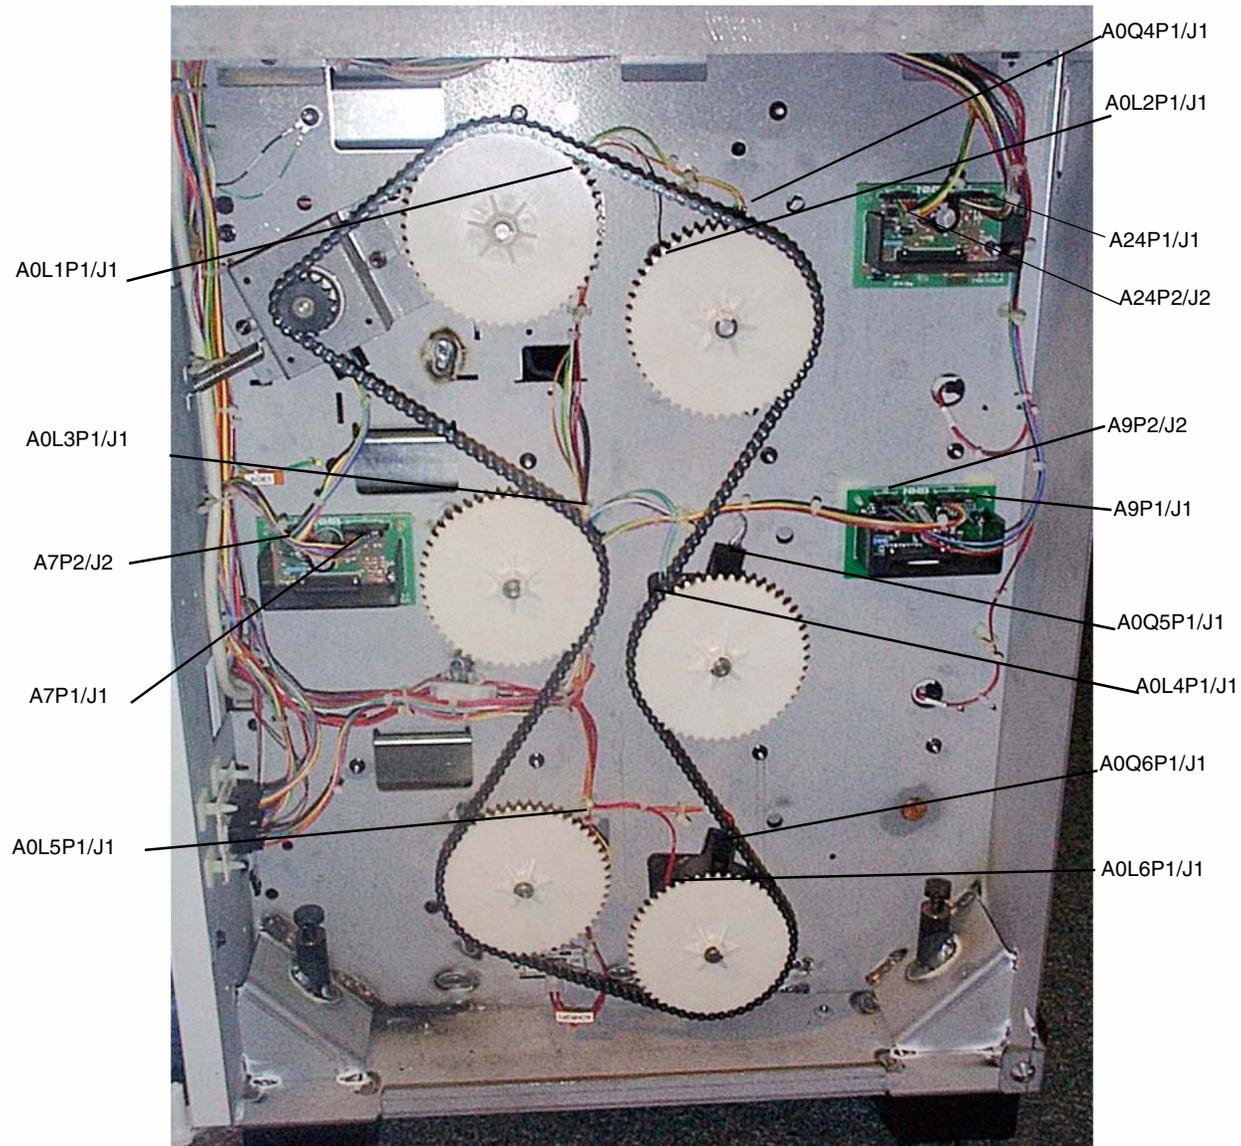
Rear Lower Frame Assembly Media Roll Drives
